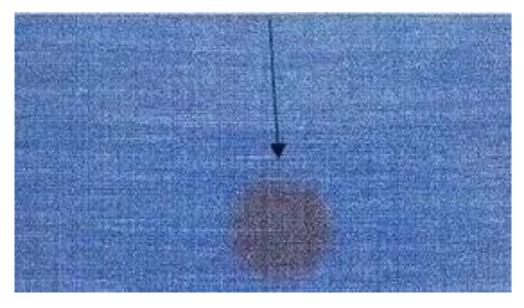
Oil spot Remedies: \square Correct machine support
